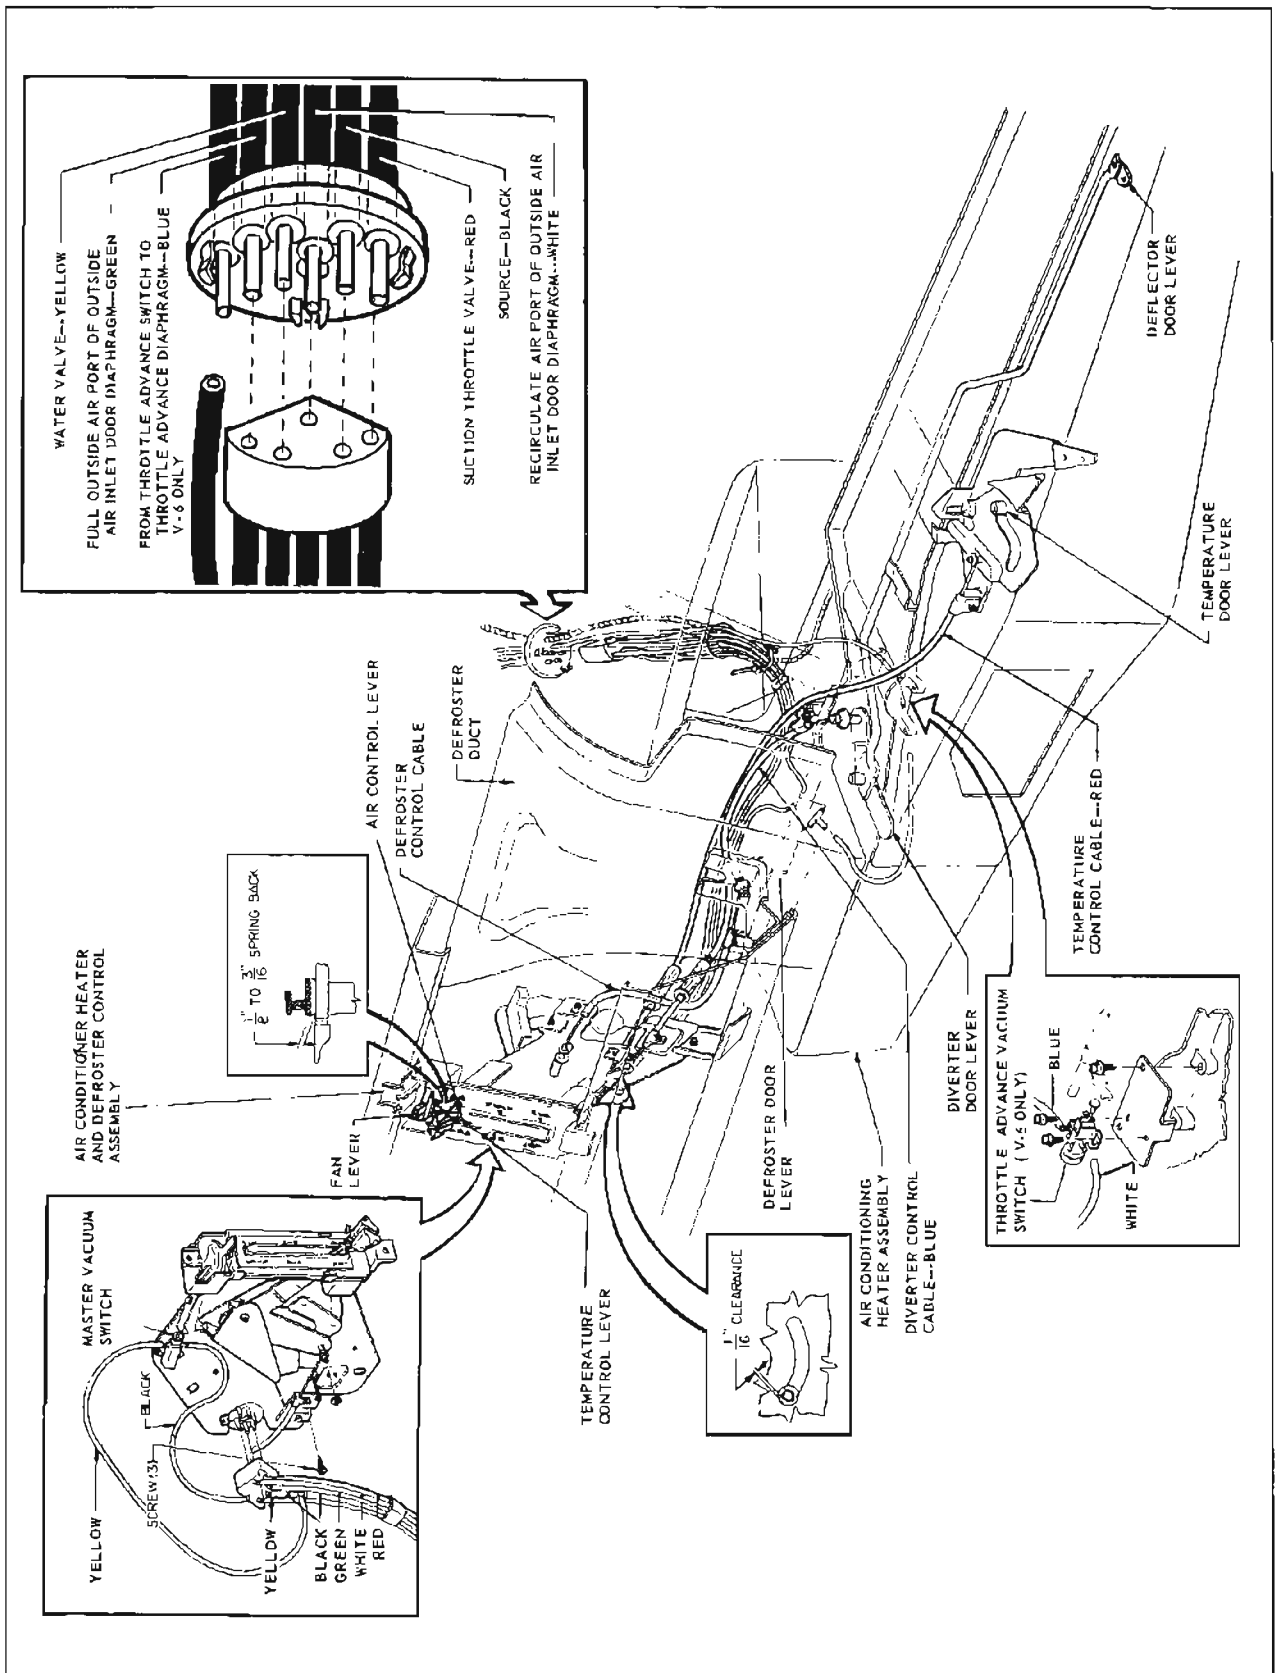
Air Conditioner Heater Assembly Control Wires and Controls
